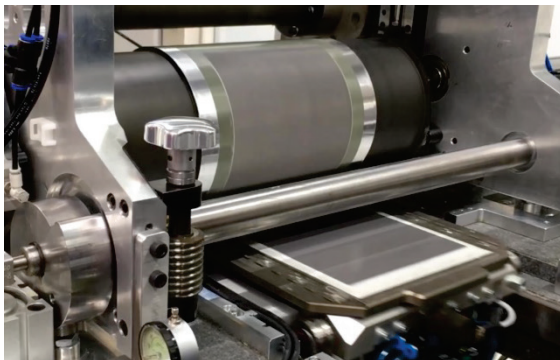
Rotary screen printing unit of the demonstrator machine.
